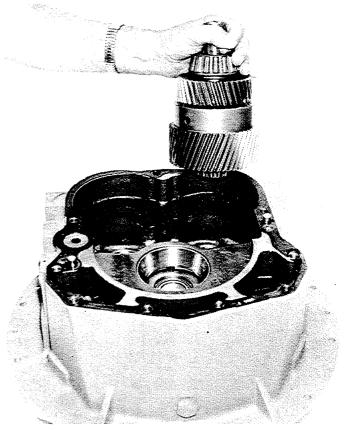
Removing or Installing the Forward Clutch Assembly.
